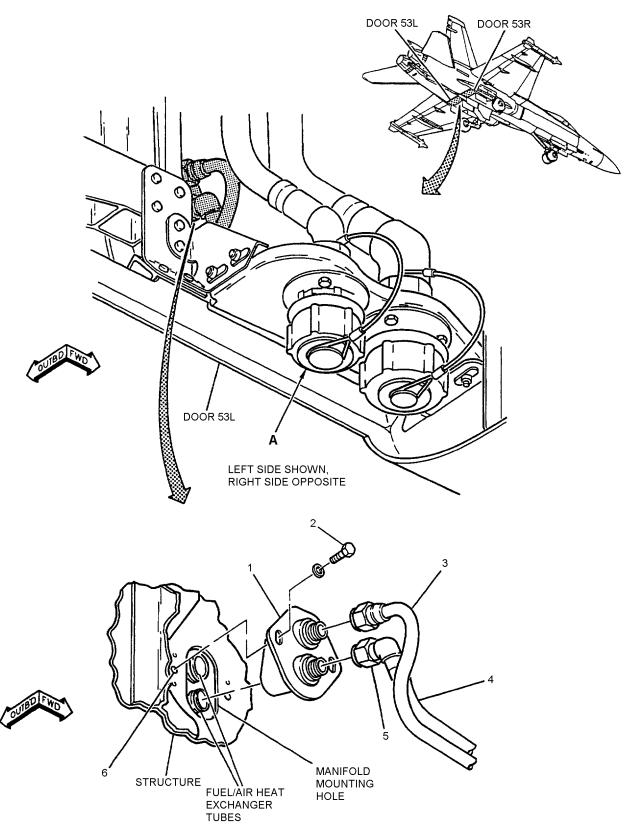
Fuel/Air Heat Exchanger Manifold (Sheet 1)
